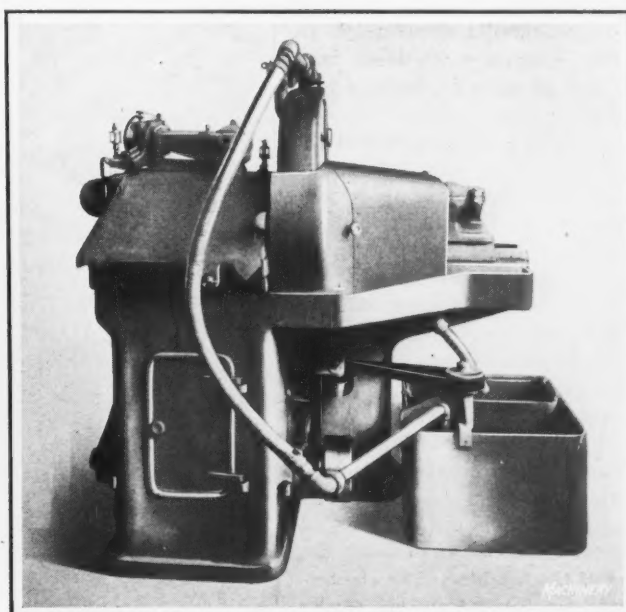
Rear View of the Landis Grinding Machine showing the Back Drive Shaft
